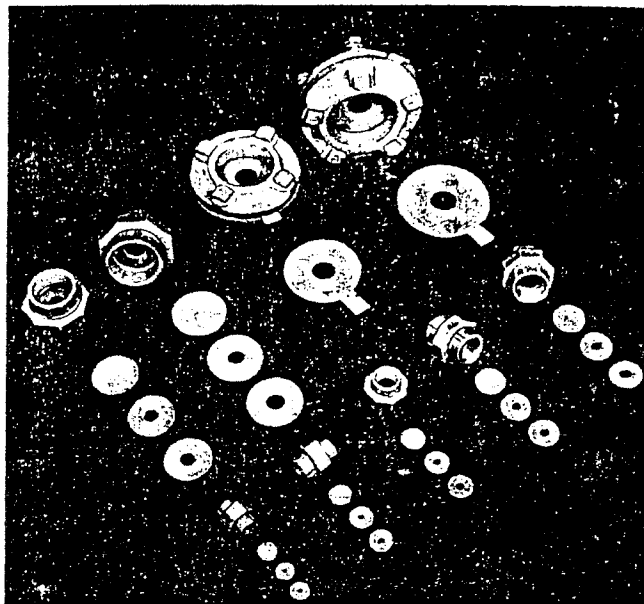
Balancing Orifice and Holders. Specially machined and gasketed unions hold orifice plates that have been carefully jig-drilled for a flow accuracy of 5%.
